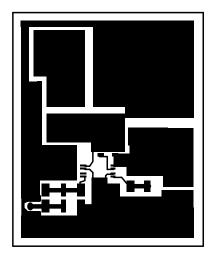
Top Layer, Typical PCB Layout (3.3V Output)
